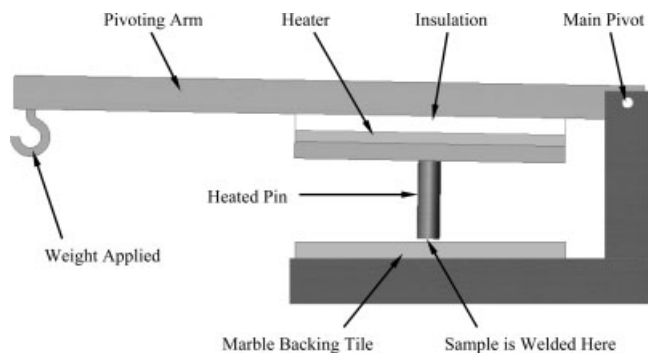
This drawing of the pivoting beam hot pin welder identifies all major components.
